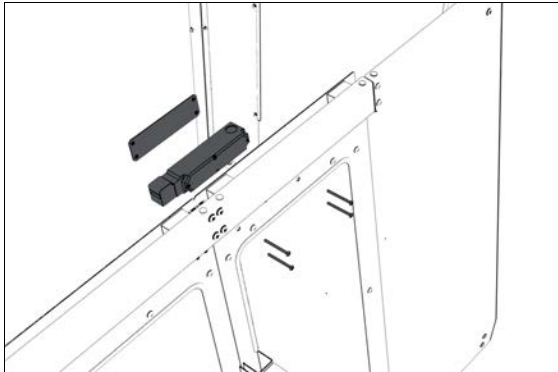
Attaching the door switch assembly to the right side of the enclosure.
